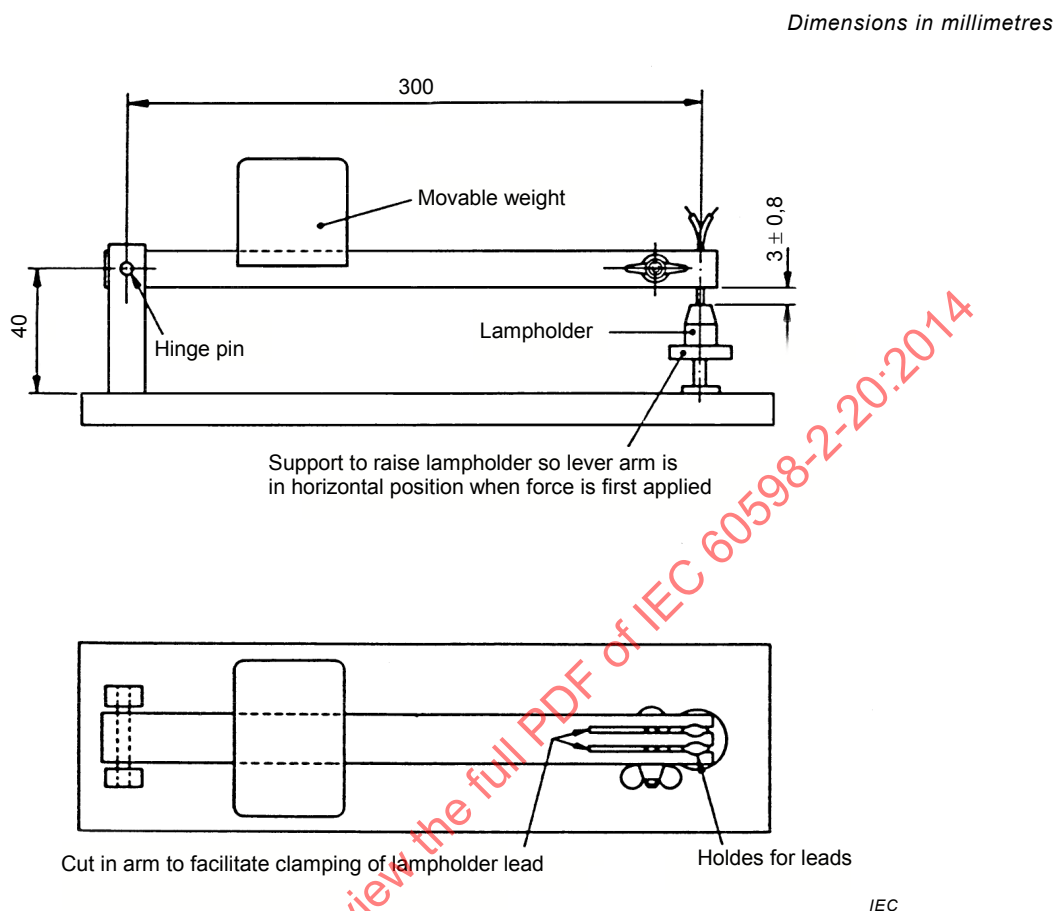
Example of test device suitable for checking security of lampholder contacts
